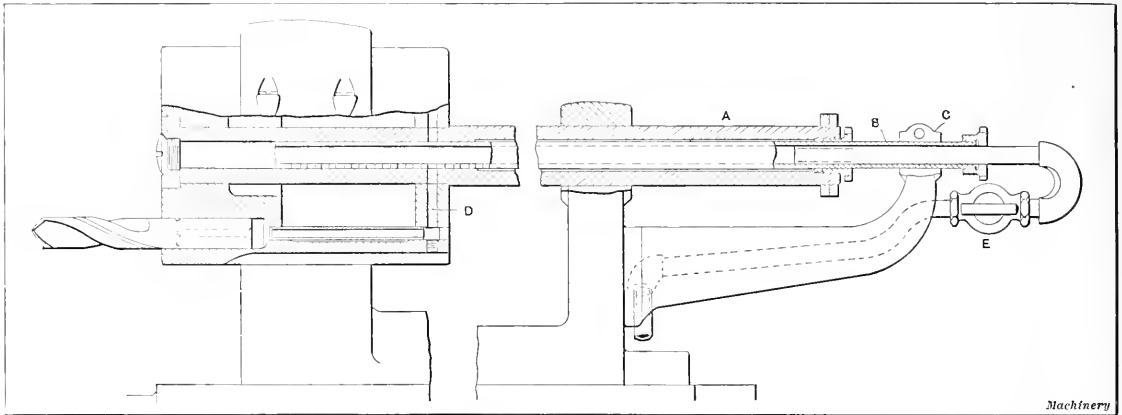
Sectional View showing Method of supplying Oil to Turret of Cleveland Automatic
